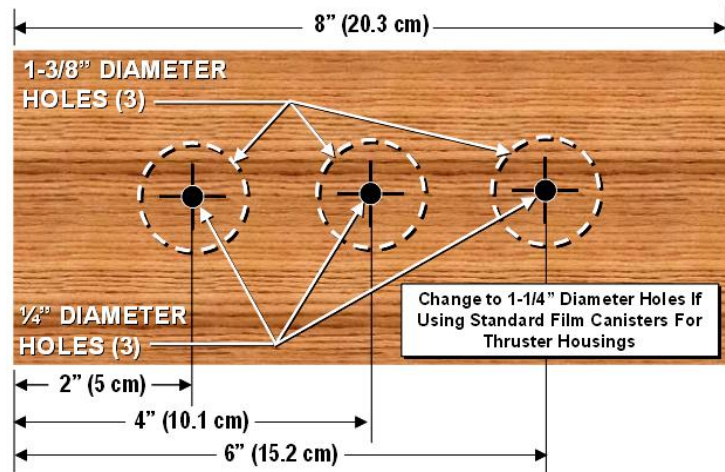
Typical Hole Spacing for a Potting Holder
